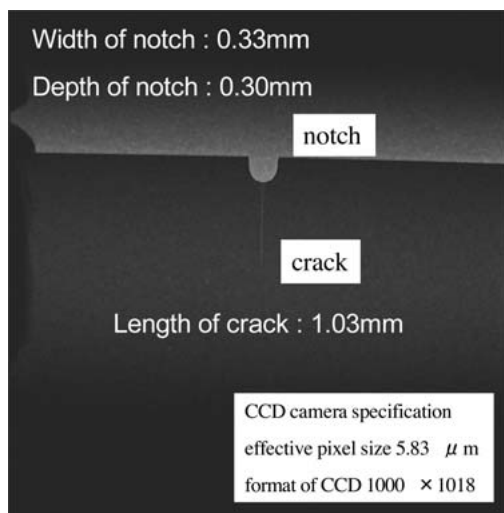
Imaging of the crack in the specimen with loading of crack opening.
